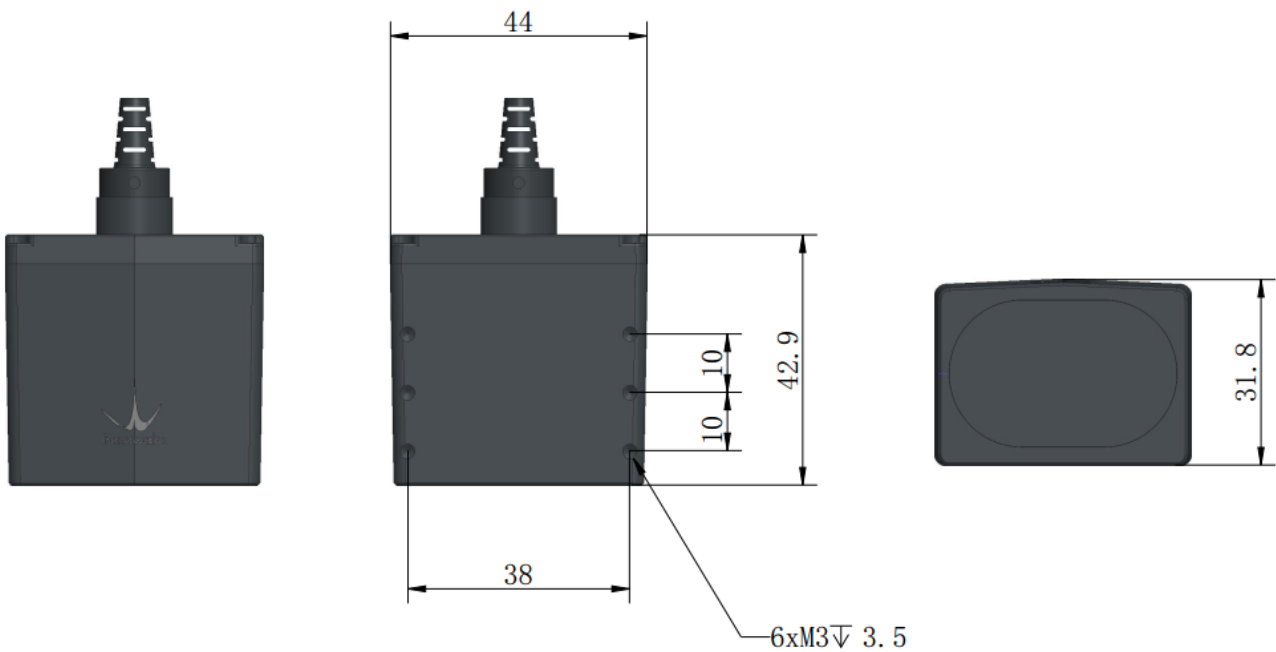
TF03 dimensions (Left 1: top view; Left 2: vertical view; Left 3: front view)
